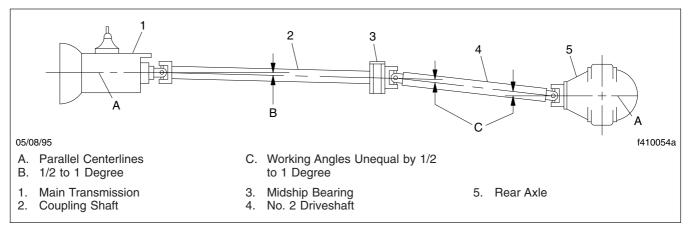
, Midship Bearing in a Single-Drive Vehicle
